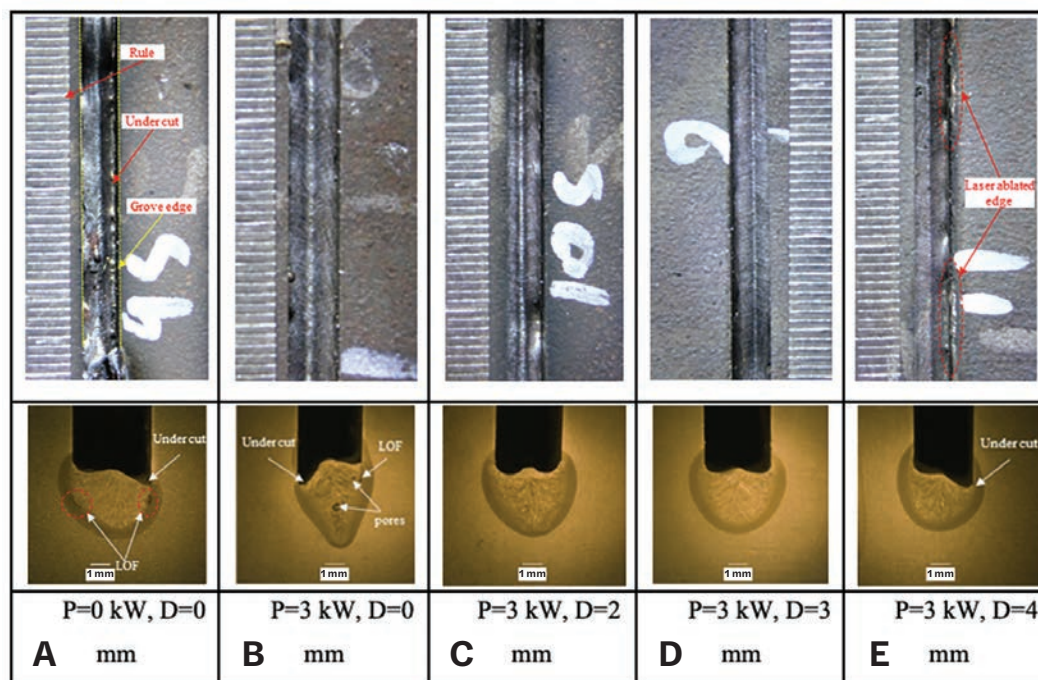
Weld appearance and cross sections under an oscillating laser beam ($V_f = 10$ m/min).
